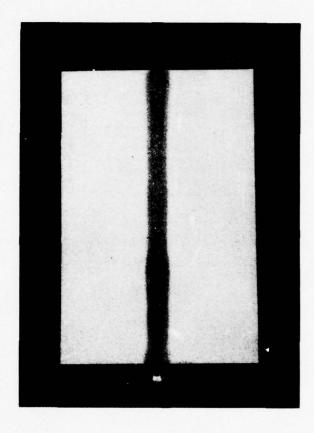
EB Butt Weld in 2-Inch-Thick HIP'd Ti-6AI-6V-2Sn Section (1.6x Mag)
